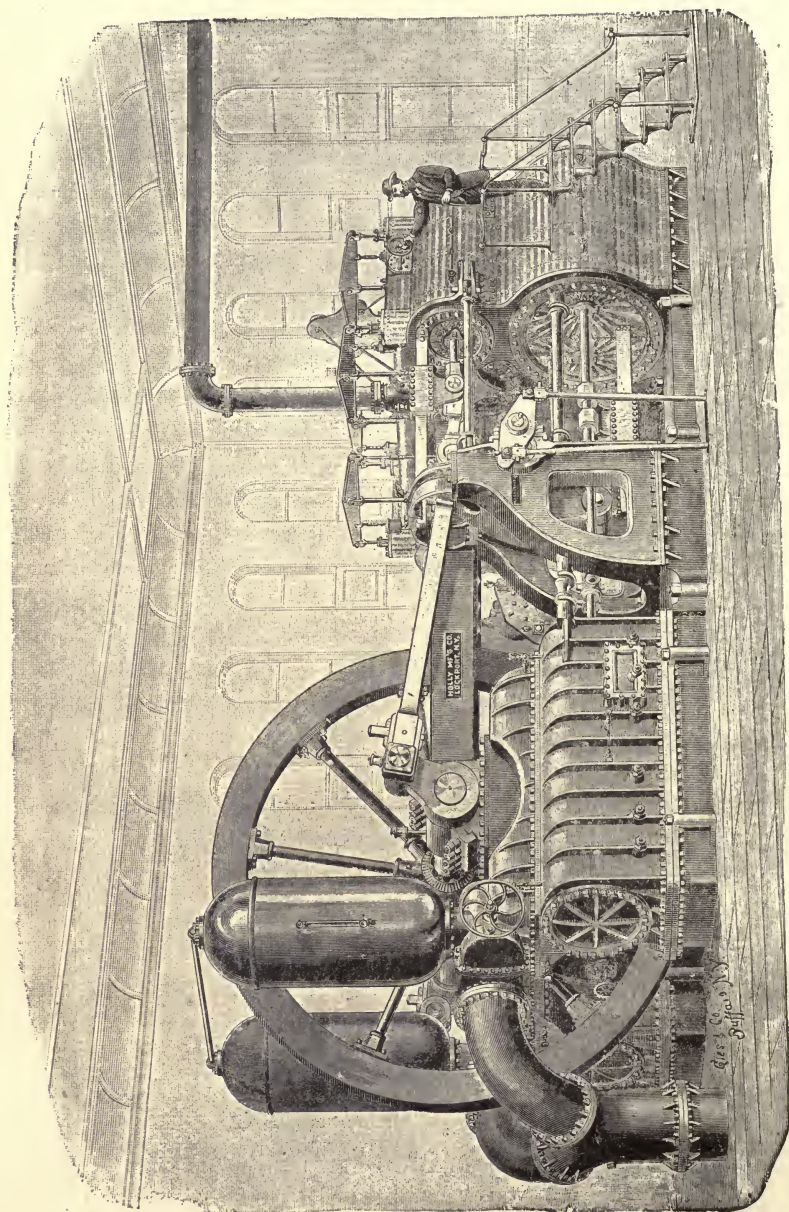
Gaskill Horizontal Compound Pumping Engine, Perspective.
